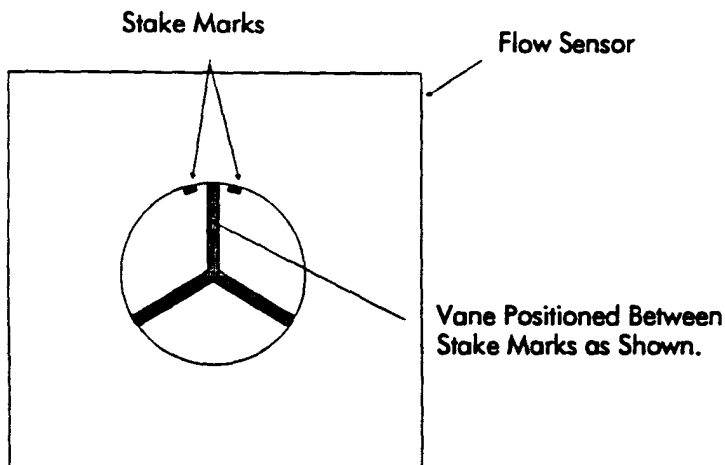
Reinstalling Turbine Assembly in Flow Sensor
